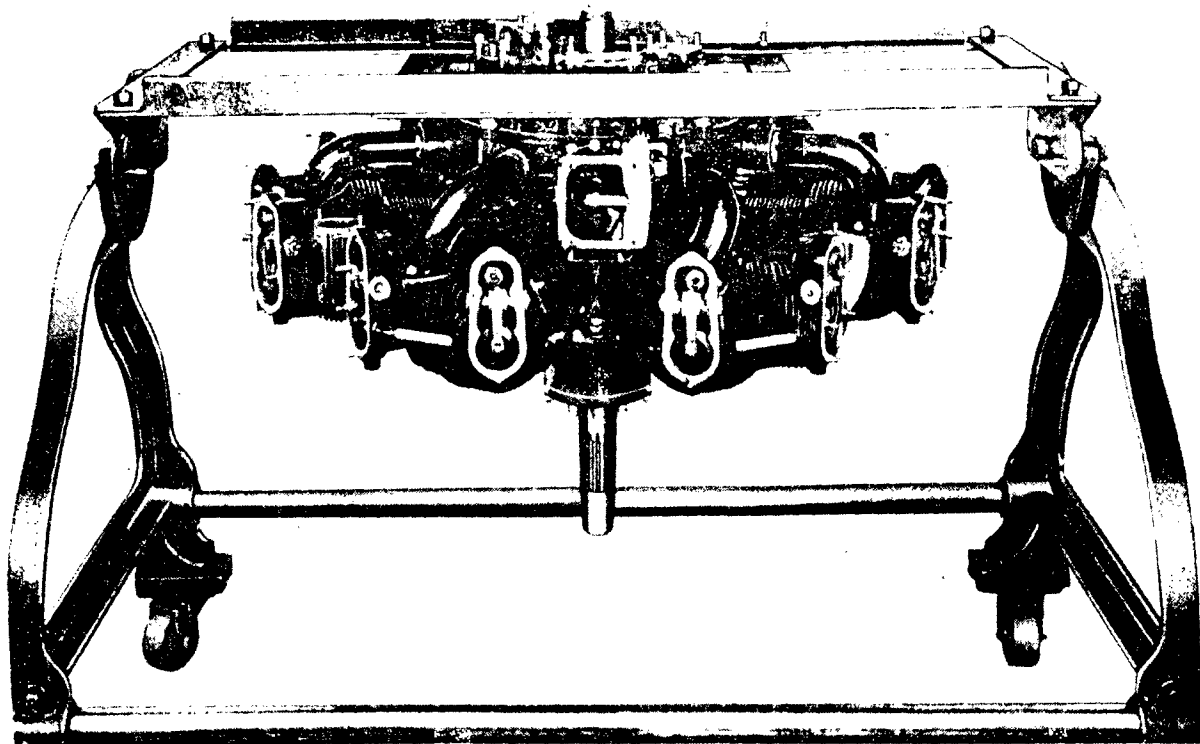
Inverted Horizontal Position of Engine Mounted on Overhaul Stand
